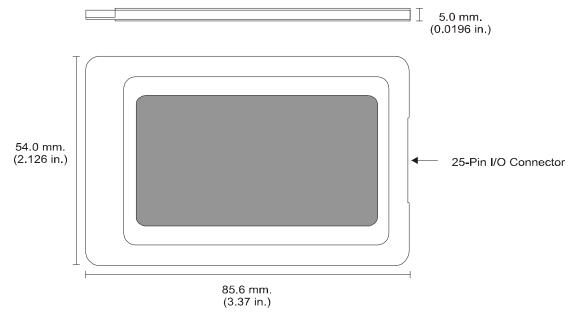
Mechanical Outline: EXC-1553PCMCIA Card Layout
